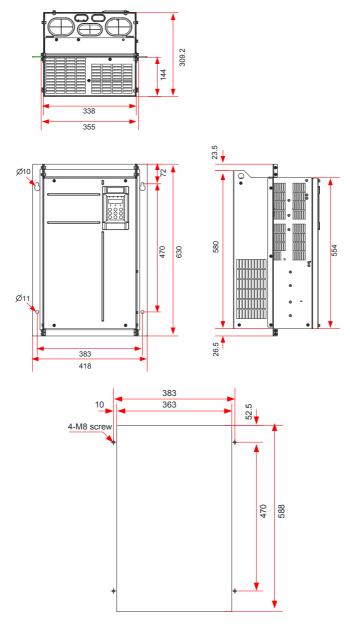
Dimensions of through hole mounting bracket and hole of MD500ET75G(B) to MD500ET110G
